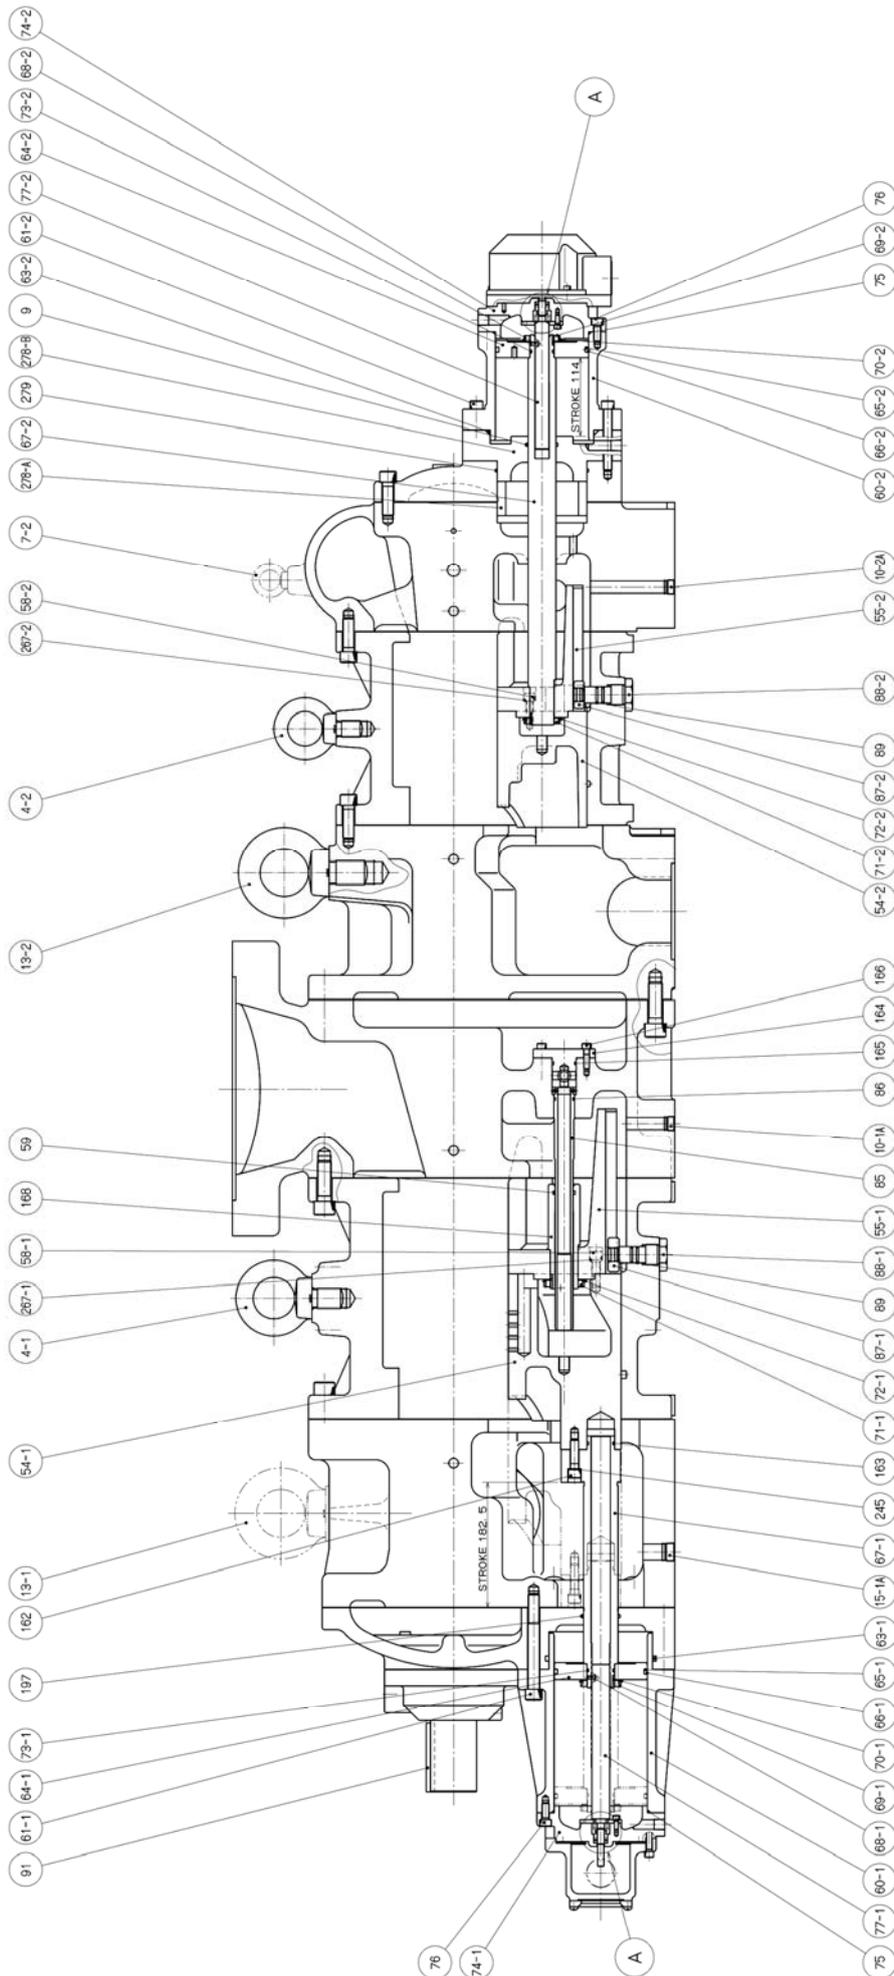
2520MMC Assembly Sectional View (Vertical)
